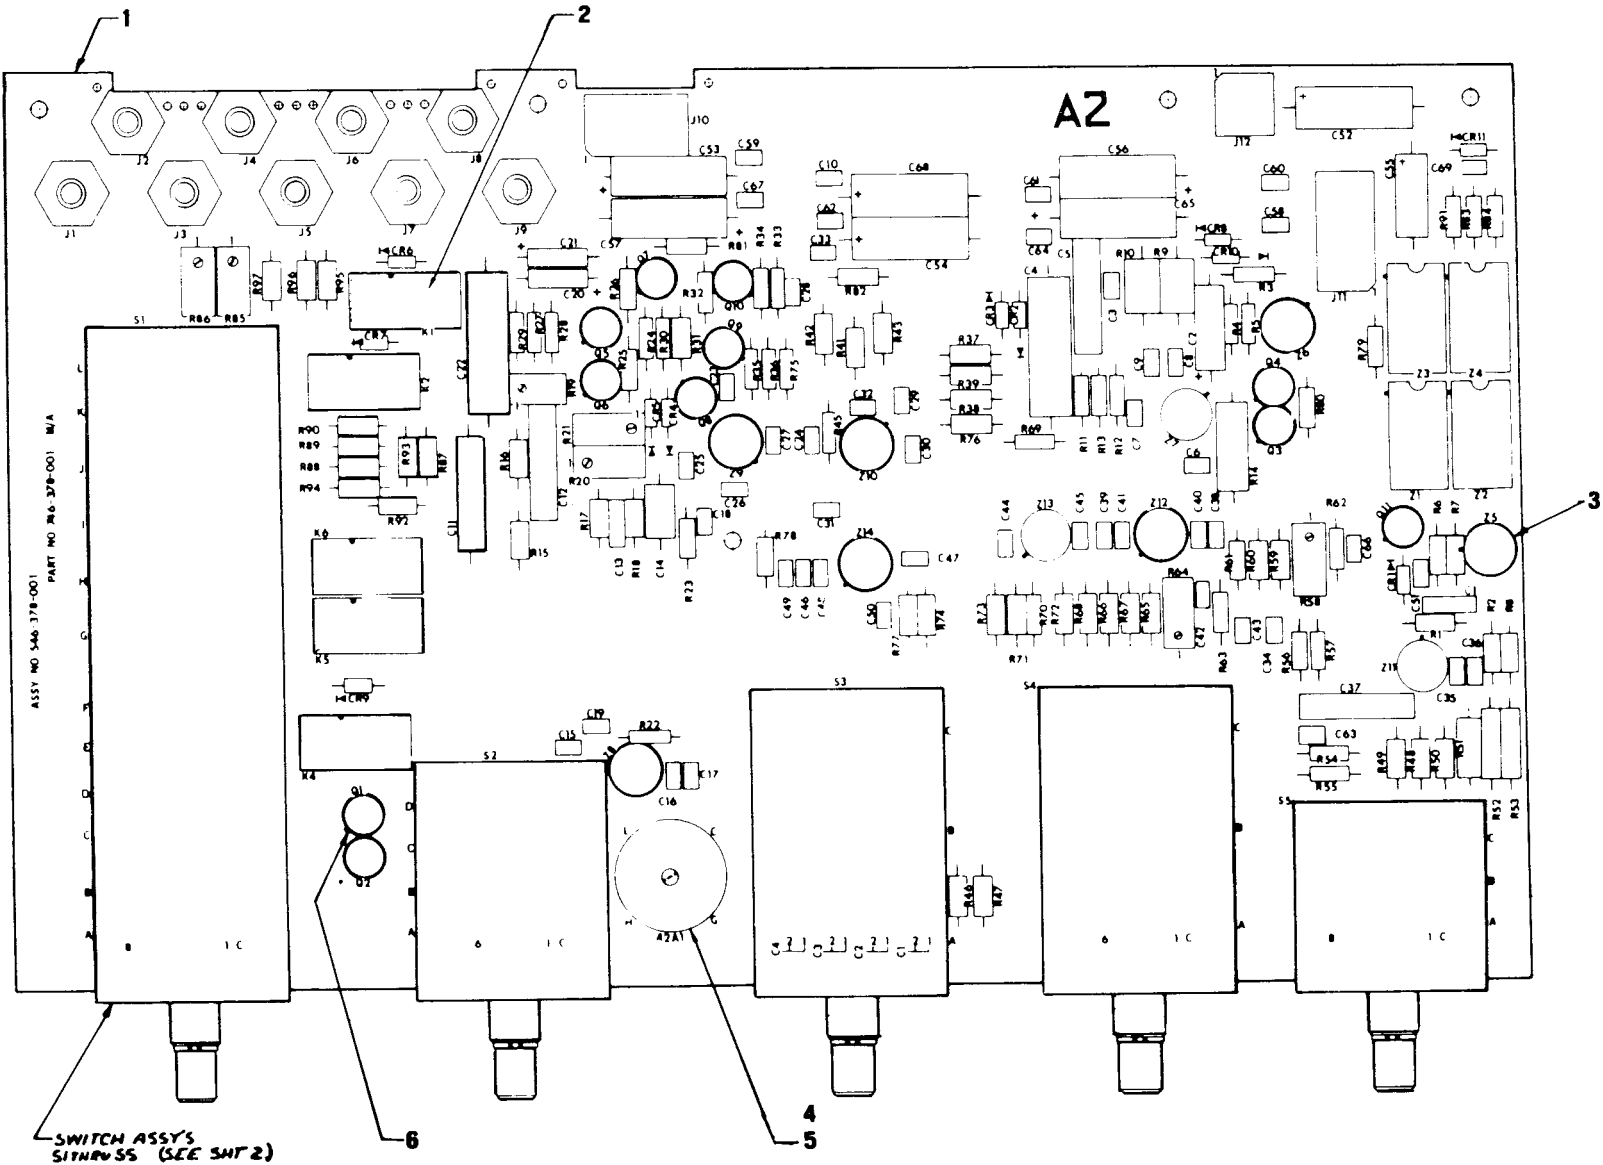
Analog P. C. Board Assembly A 2 (Sheet 1 of 3)
